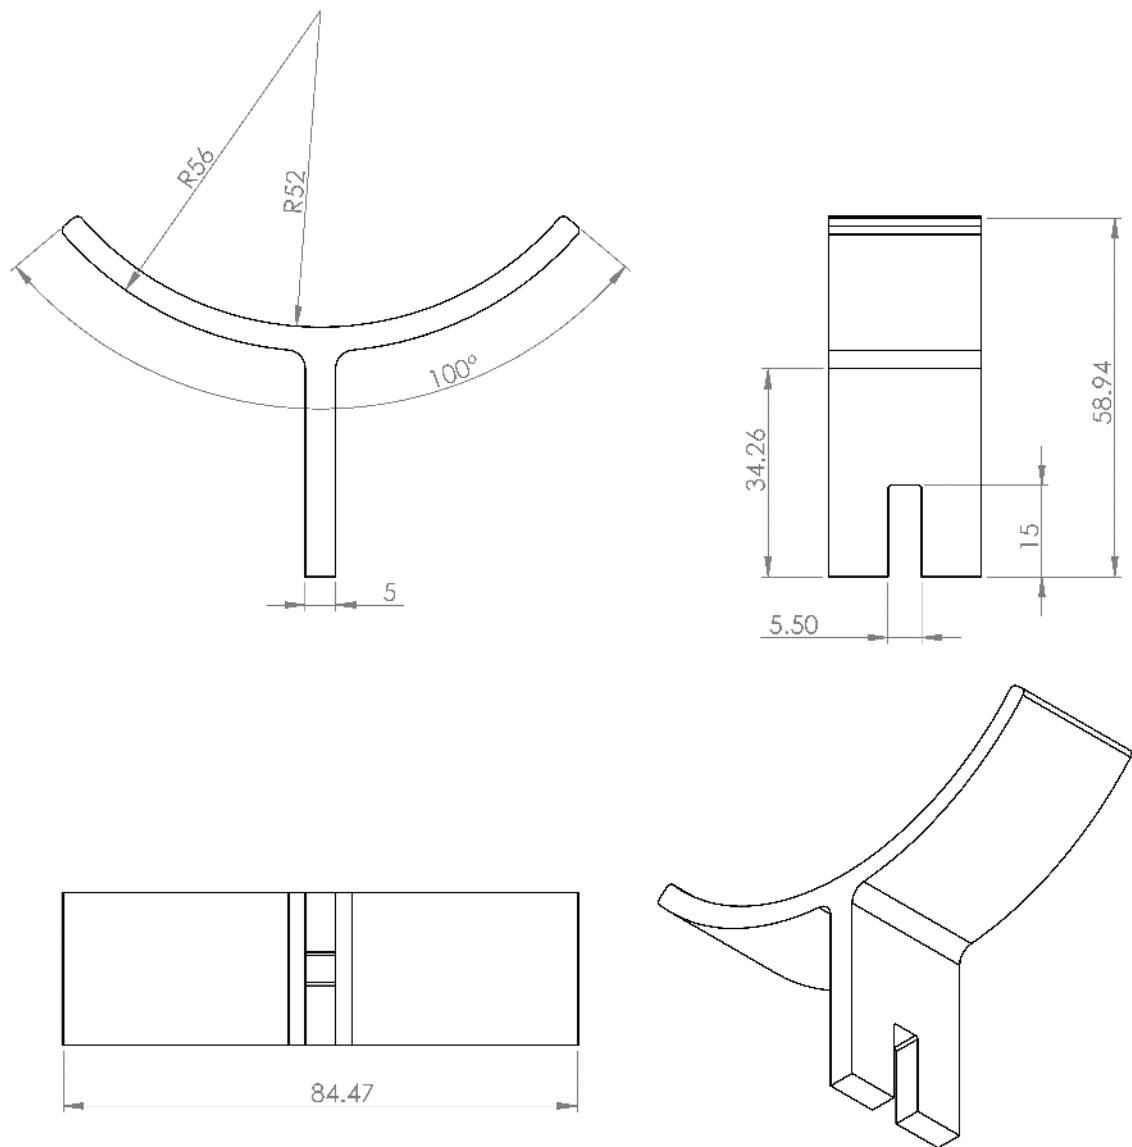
3D-printed vacuum cylinder holder, the slot on the bottom fits inside the mount and key shown in Figure 10 (unit: mm)
